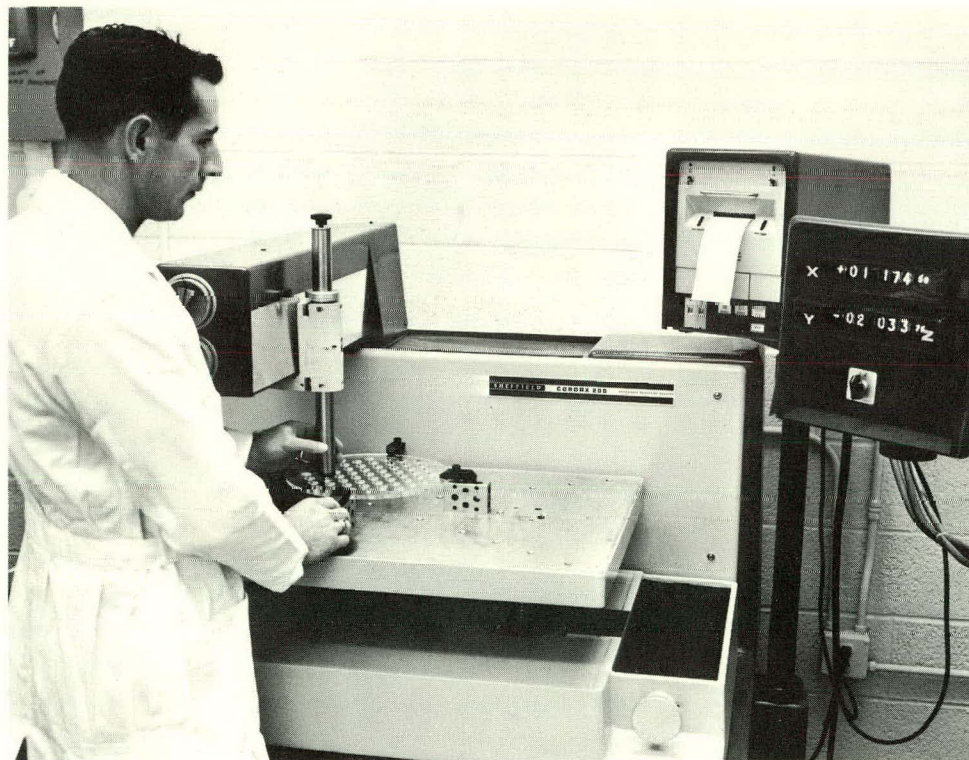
Inspector using the coordinate measuring machine to determine the precise location of holes in a bed-plate for a fuel element experiment.
